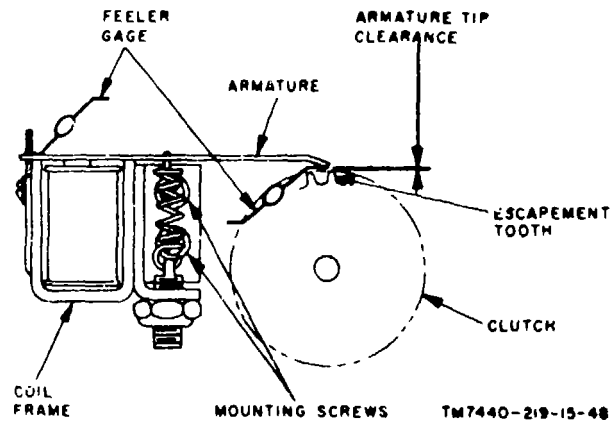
Capstan drive mechanism armature tip clearance requirement.
